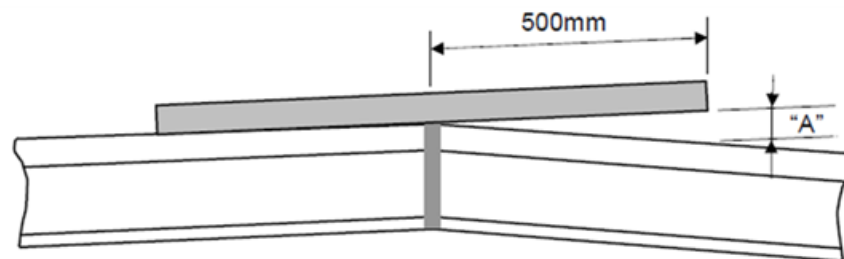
Weld misalignment tolerance in vertical plane (peaking)
